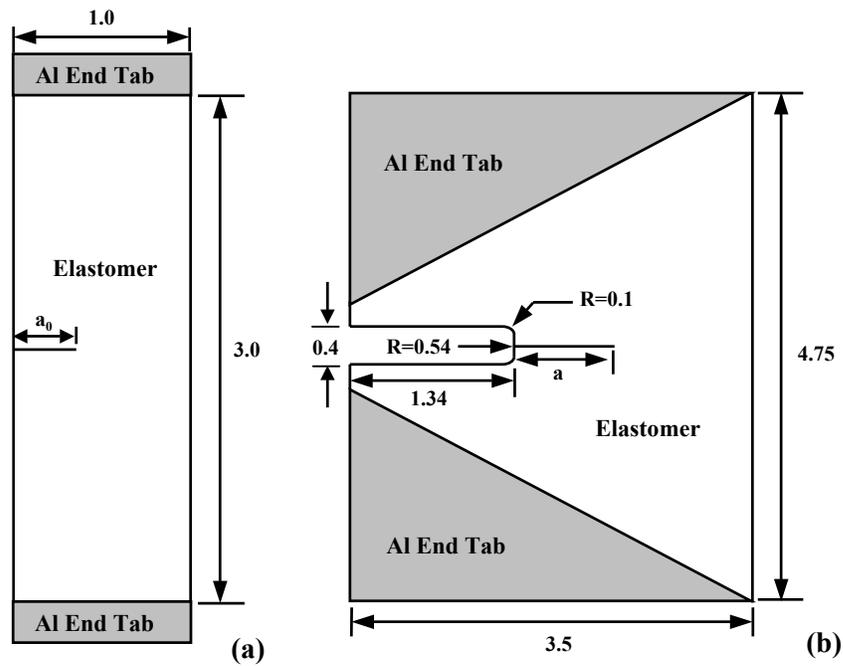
Specimens geometry; (a) Uniaxial specimen (b) Wedge specimen; all of the dimensions are in the unit of inch
